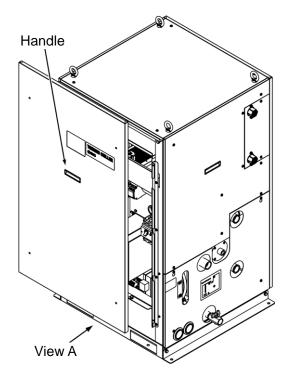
Remove the front panel of the electrical unit (This drawing is water cooled type.)
